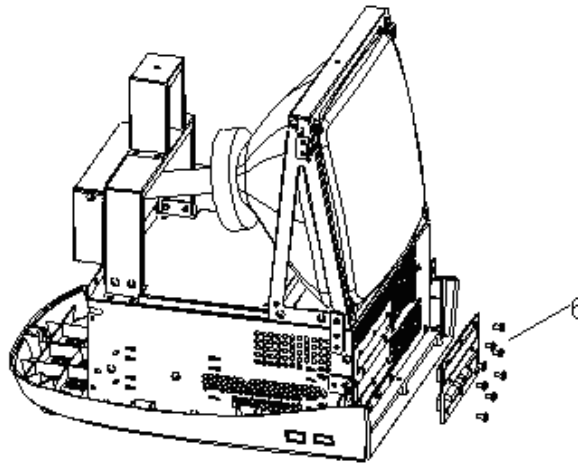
Sketch Map of Connection Board of Main Unit Disassembly
